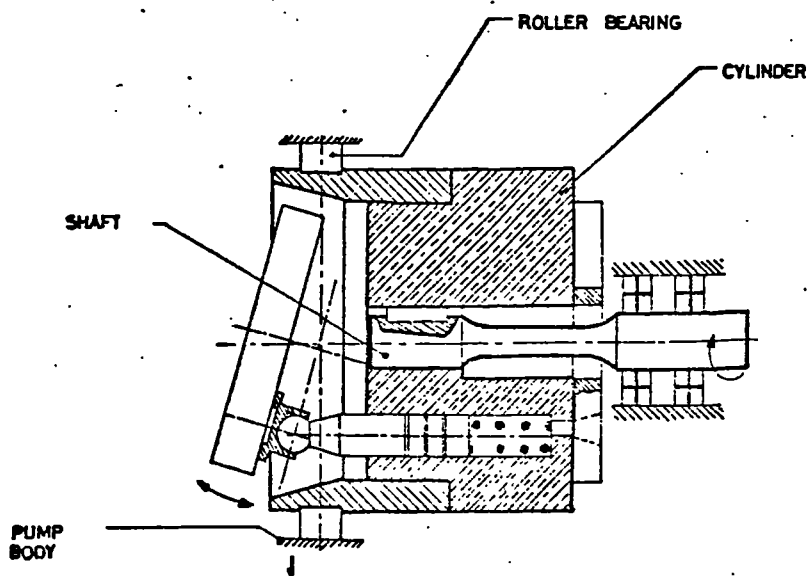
AXIAL PISTON PUMP DESIGNED TO UTILISE A 'FLEXIBLE' SHAFT
